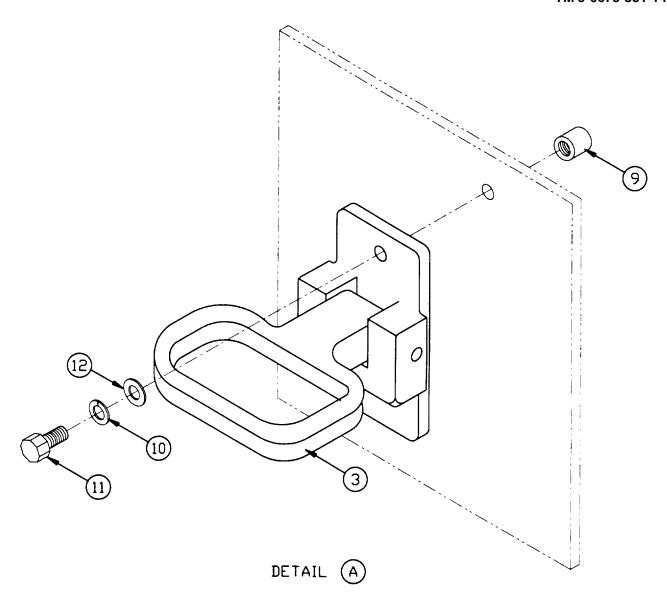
STEP AND LADDER ASSEMBLY (SHEET 2 OF 4)
